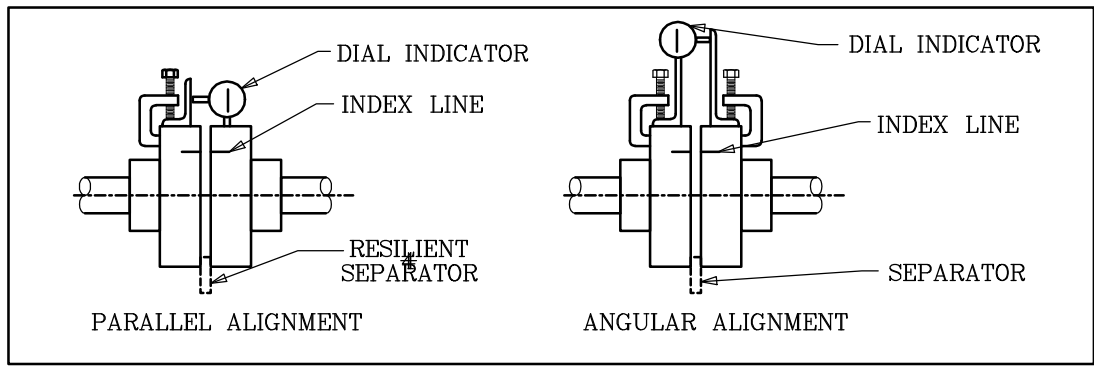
TESTING ALIGNMENT, DIAL INDICATOR
